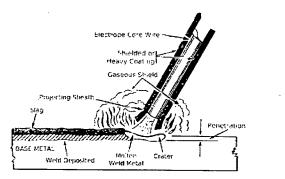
Shielded Metal Arc Welding Diagram
